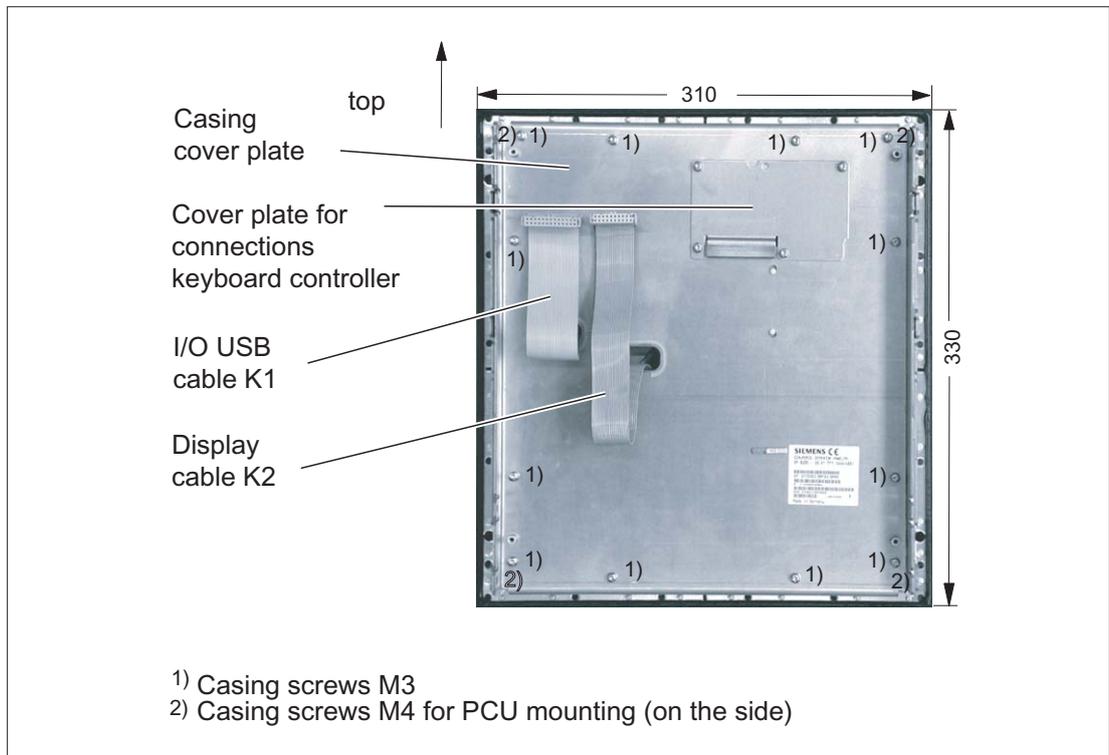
Rear side of operator panel front with arrangement of interfaces and mounting screws
